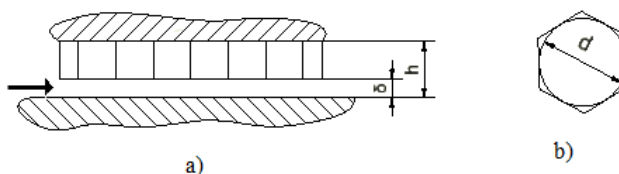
Dimensions of the honeycomb seal assumed in the calculations: a) side view on the seal, b) view on the single seal chamber.
